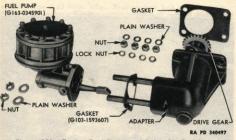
Engine Fuel Pump and Drive Shaft Adapter
